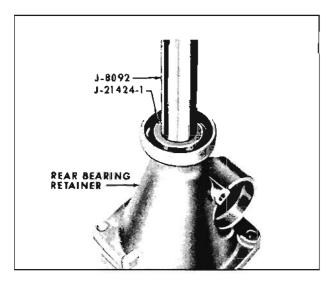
B Installing Rear Bearing Retainer Bushing
